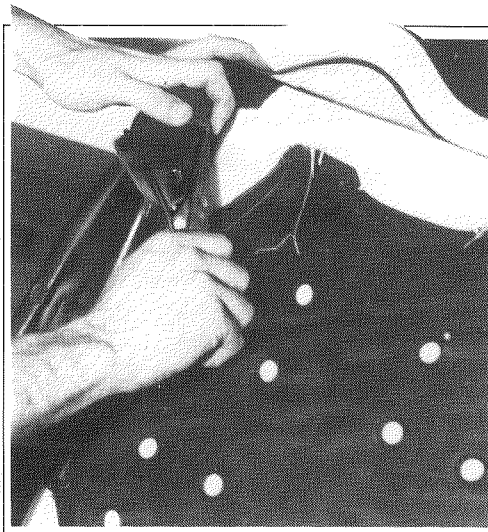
Make sure the inner, side stiffening boards are pushed firmly to the top of their channel, roll the cover tails over the frame and secure each side with a couple of 'C' clips - push one end into the material and pull the clip over the frame with pliers. Check that the flutes of the squab line up with those on the base cover. If not the base can be moved slightly sideways to suit by removing the single rear clip and tensioning the foam/cover one way or the other. Reclip.
